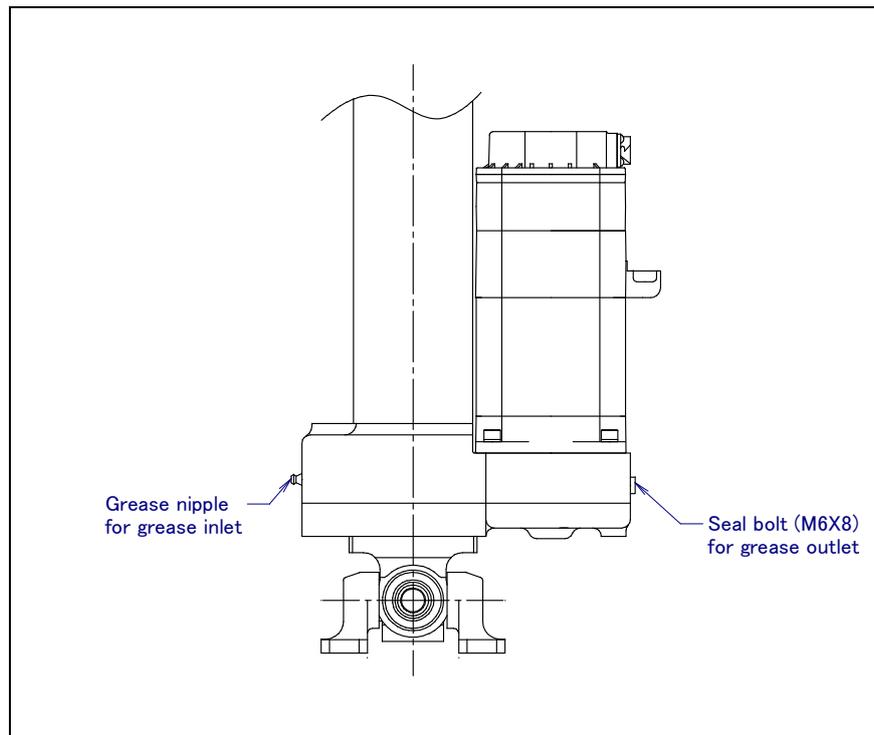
(b) Replacing grease of gearbox (J2,J5-axis)
